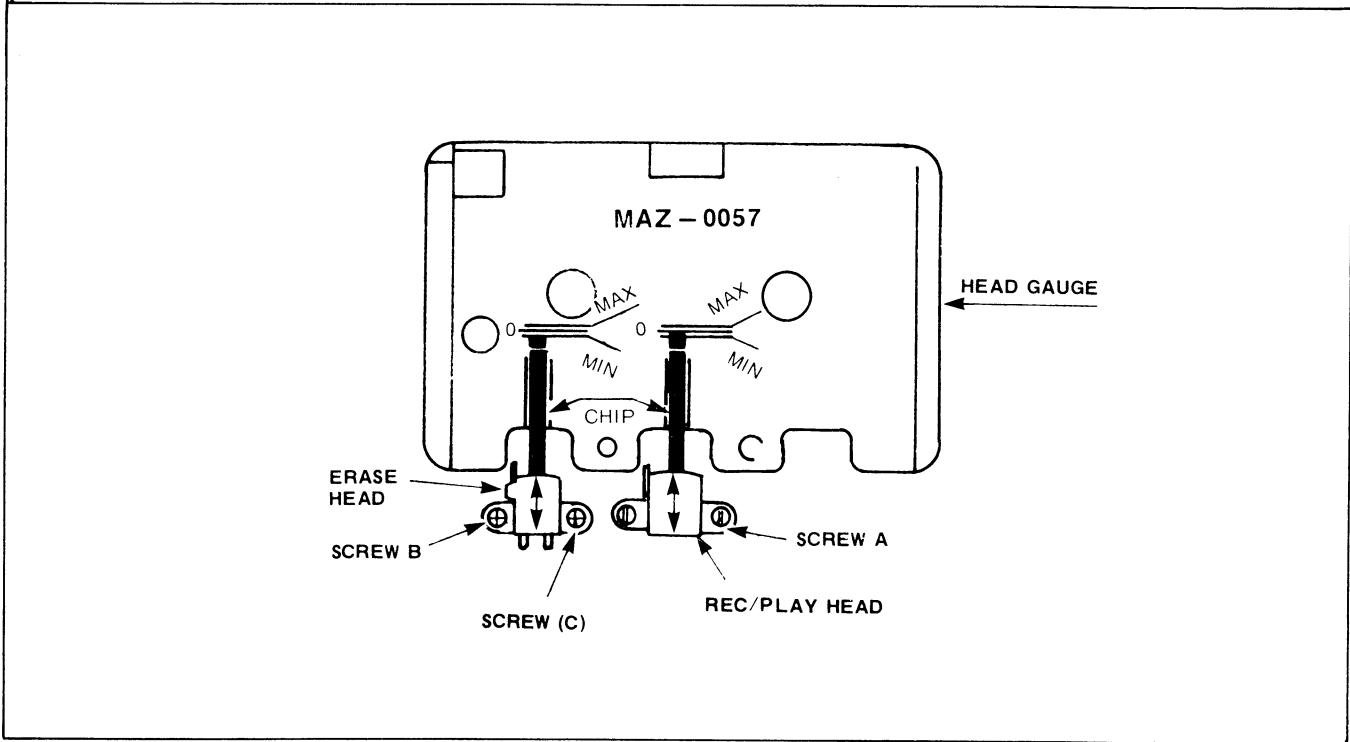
Figure AX. Head Lateral Clearance Adjustment for the Play/Record Head and Erase Head
